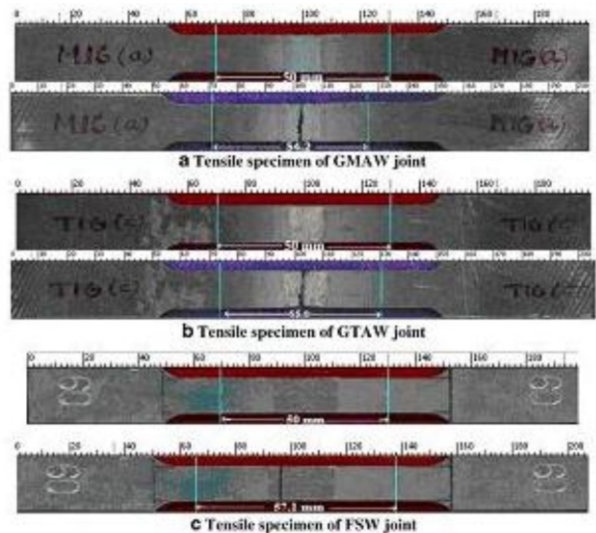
Fracture location of tensile specimens - K. Elangovan *et al* [28]
